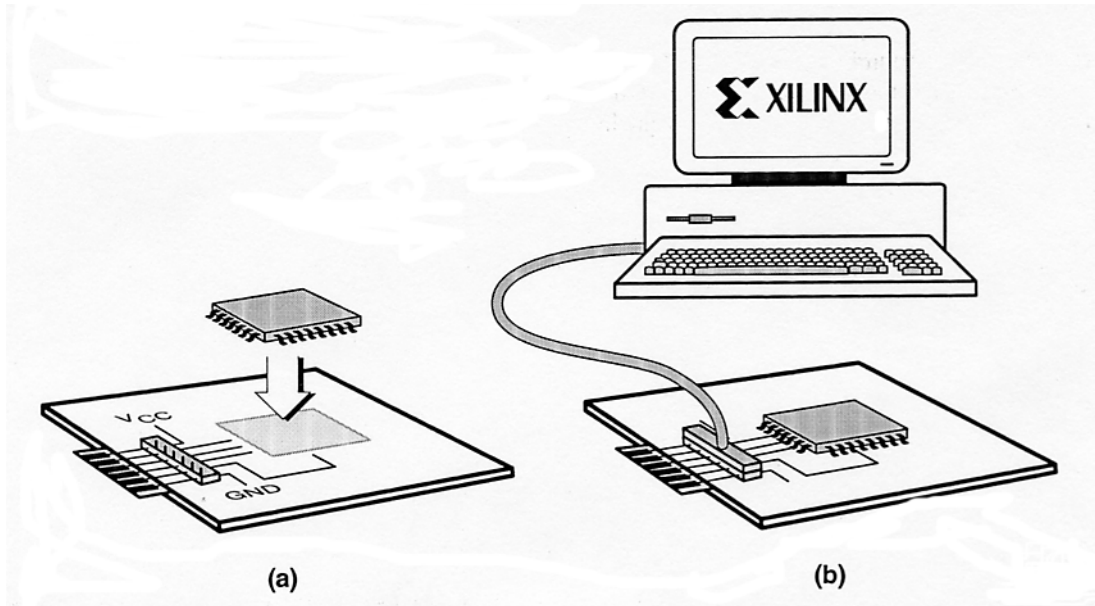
The XC9500 CPLD In-System Programming Operation: (a) Solder Device to PCB and (b) Program Using Download Cable (Courtesy Xilinx, Inc.)
